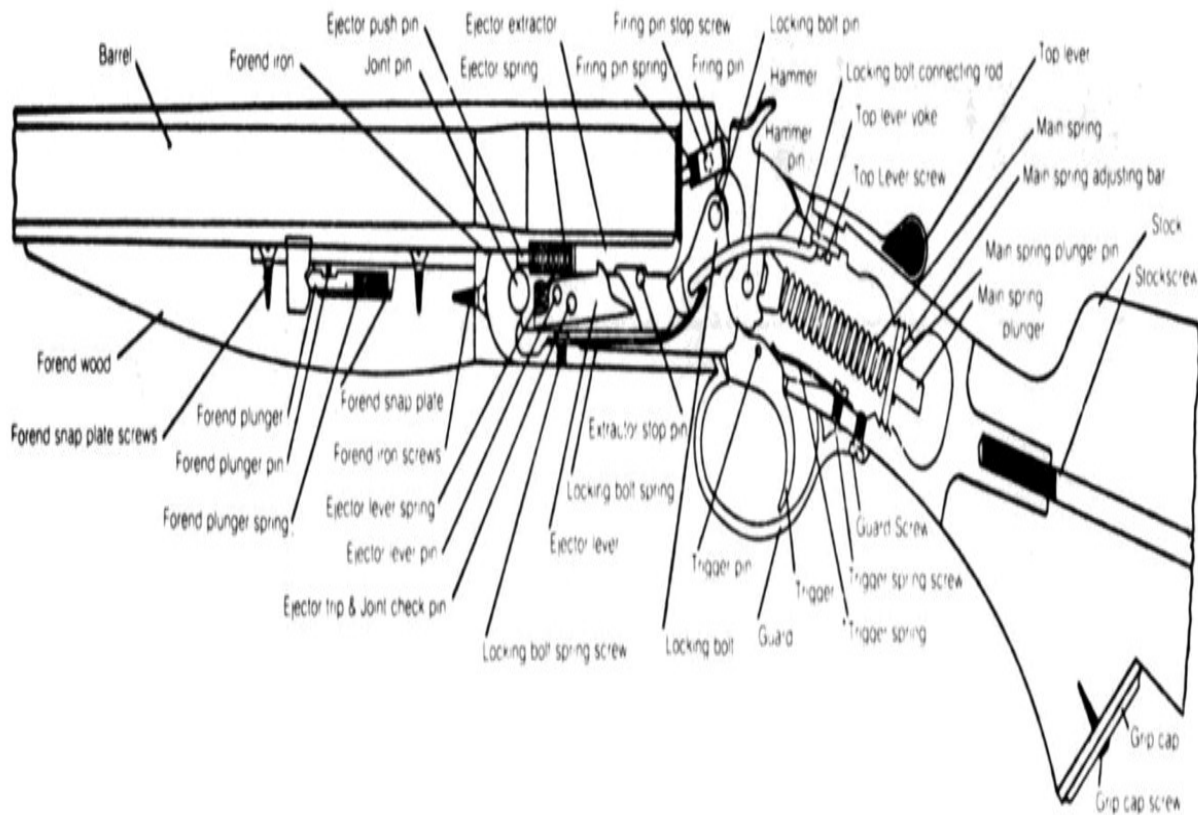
Sectional view of an Iver Johnson "Champion" single-shot, break-open shotgun. This design is similar to most break-open shotguns manufactured in the United States for the past 100 years.
